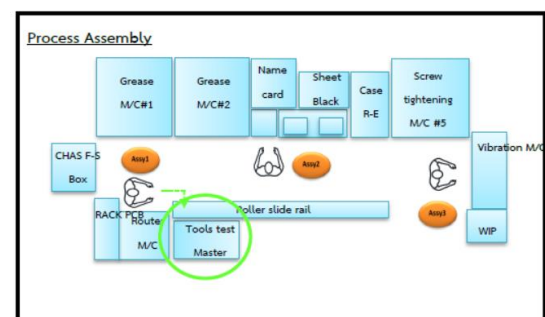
Storage of test master equipment at Assembly 1 (after improvement)
